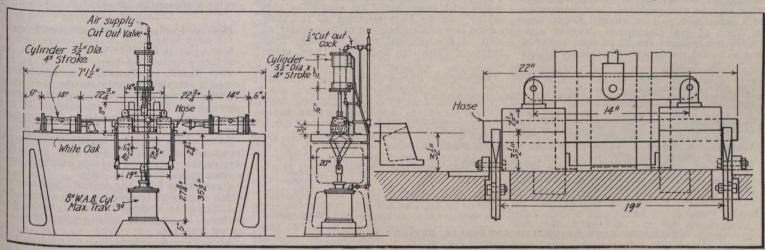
C.N.R. Hose Mounting Machine, with Detail of Clamping Heads.
